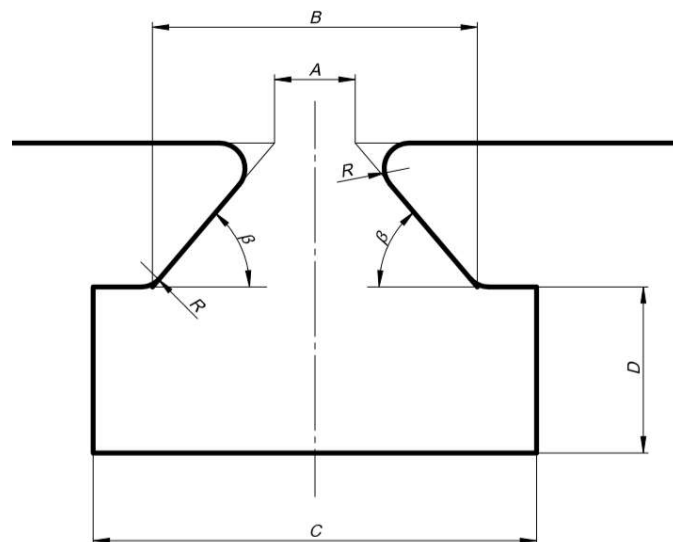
Blade's Slot Dimensions for Tool Design
